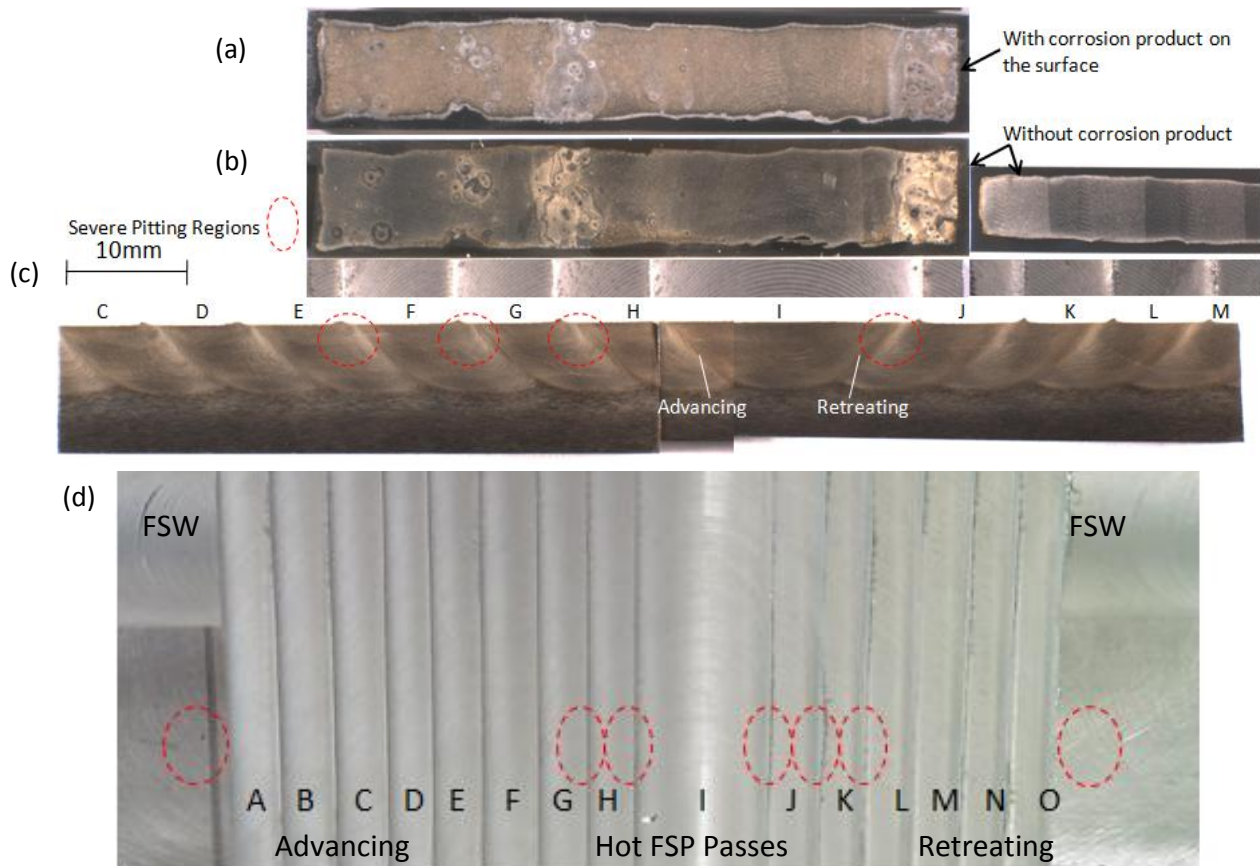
Series of optical macrographs showing hot FSP specimens following 10 day, 0.1M NaCl immersion testing, with (a) the corrosion product on the surface, (b) the corrosion product removed, (c) the cross-section and plan view of the relative FSP passes with the locations of severe pitting attack, and (d) the plan view of the entire series of cold FSP passes with the locations of severe pitting attack
